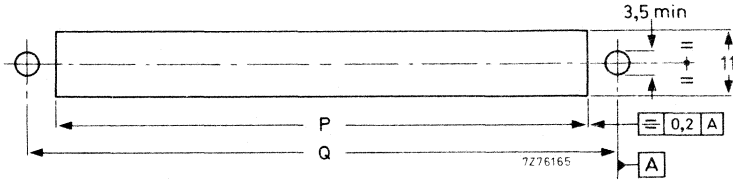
Panel cut-out; see Table 3 for dimensions P and Q.
